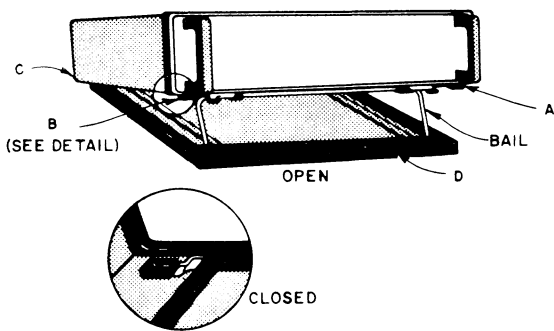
The bail can be used to tilt the instrument, providing a better view of the front-panel indicators.
